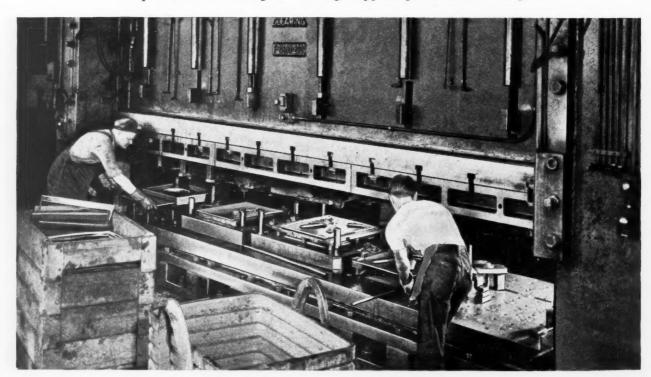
Top plates for the steering-clutch cases are blanked and pierced from 5/8-inch thick stock on a 3500ton hydraulic press that is equipped with a 1000-ton pressure cushion
